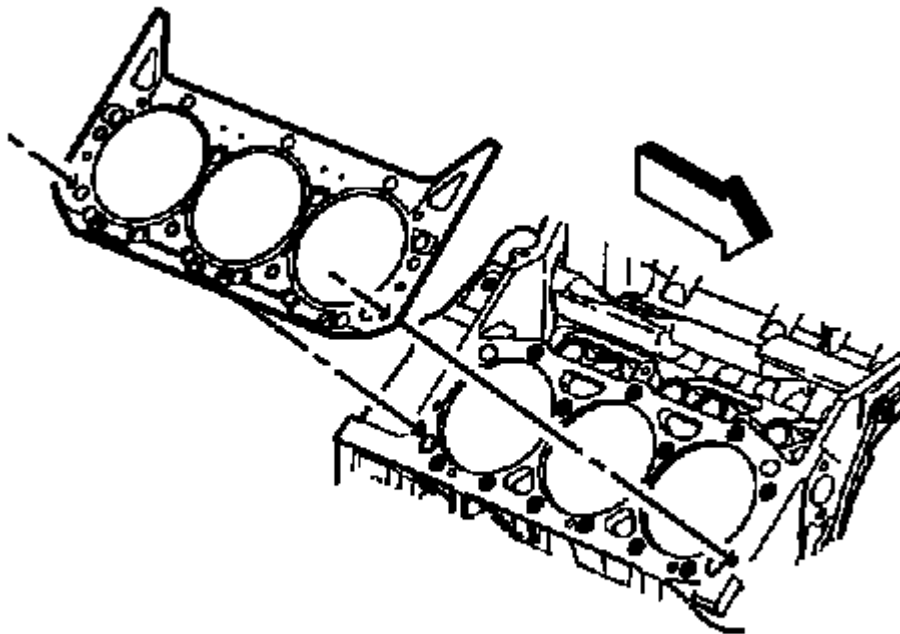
View Of Cylinder Head Gasket & Alignment Pins - Right
